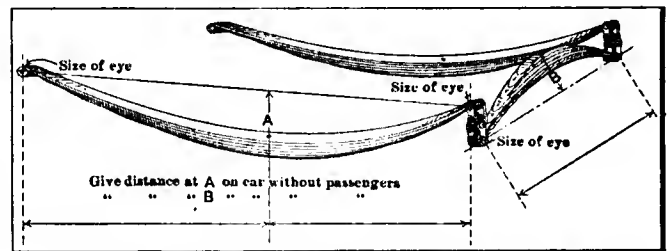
Example of platform type of spring, showing cross member at rear; may be in front
